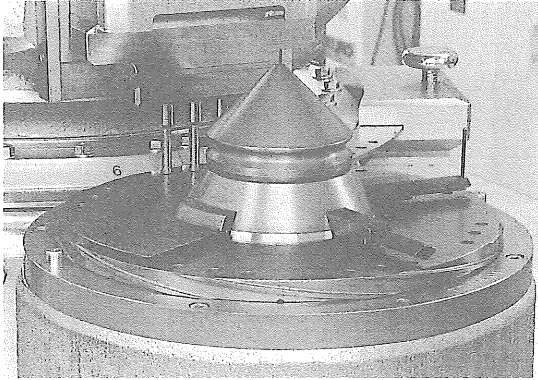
Filling Part (Oscillating Blade and Filling Rod, this view is EMT18)
